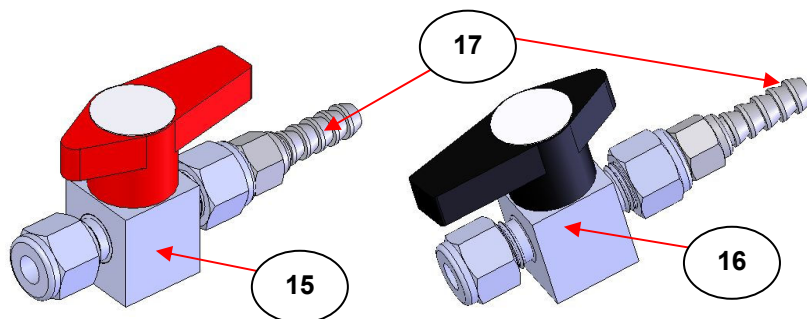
Tornado™ Vacuum Gas Cell Inlet (Red Tap) and Outlet (Black Tap) Valves - Specac P/N GS24161
